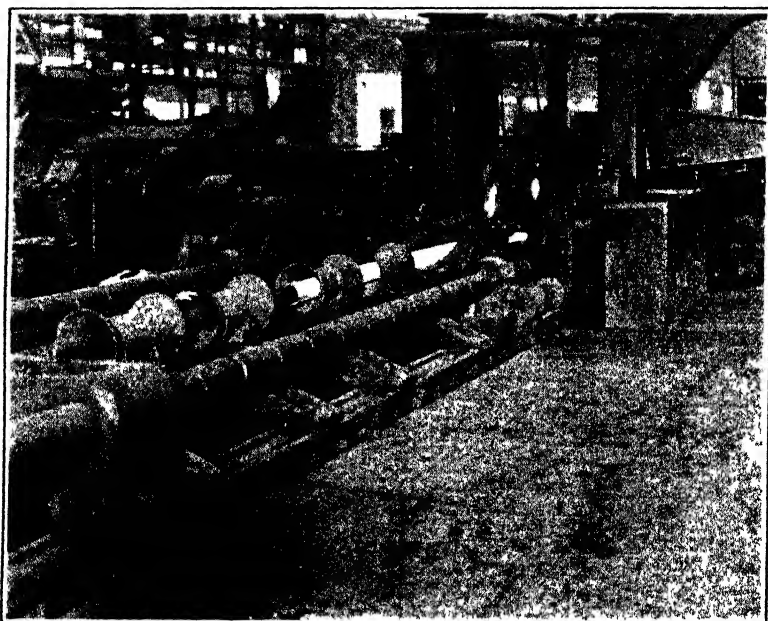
Pipe rolls showing the welded pipe coming toward the observer over the mandril and rod.
